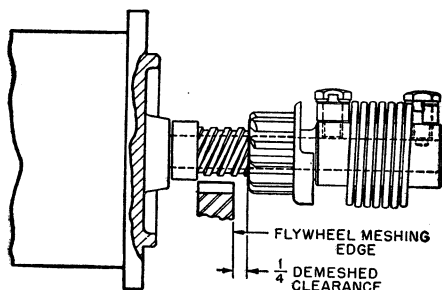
Overrunning clutch motor equipped with adjustable plunger stud for adjusting pinion clearance (see Fig. 27)
